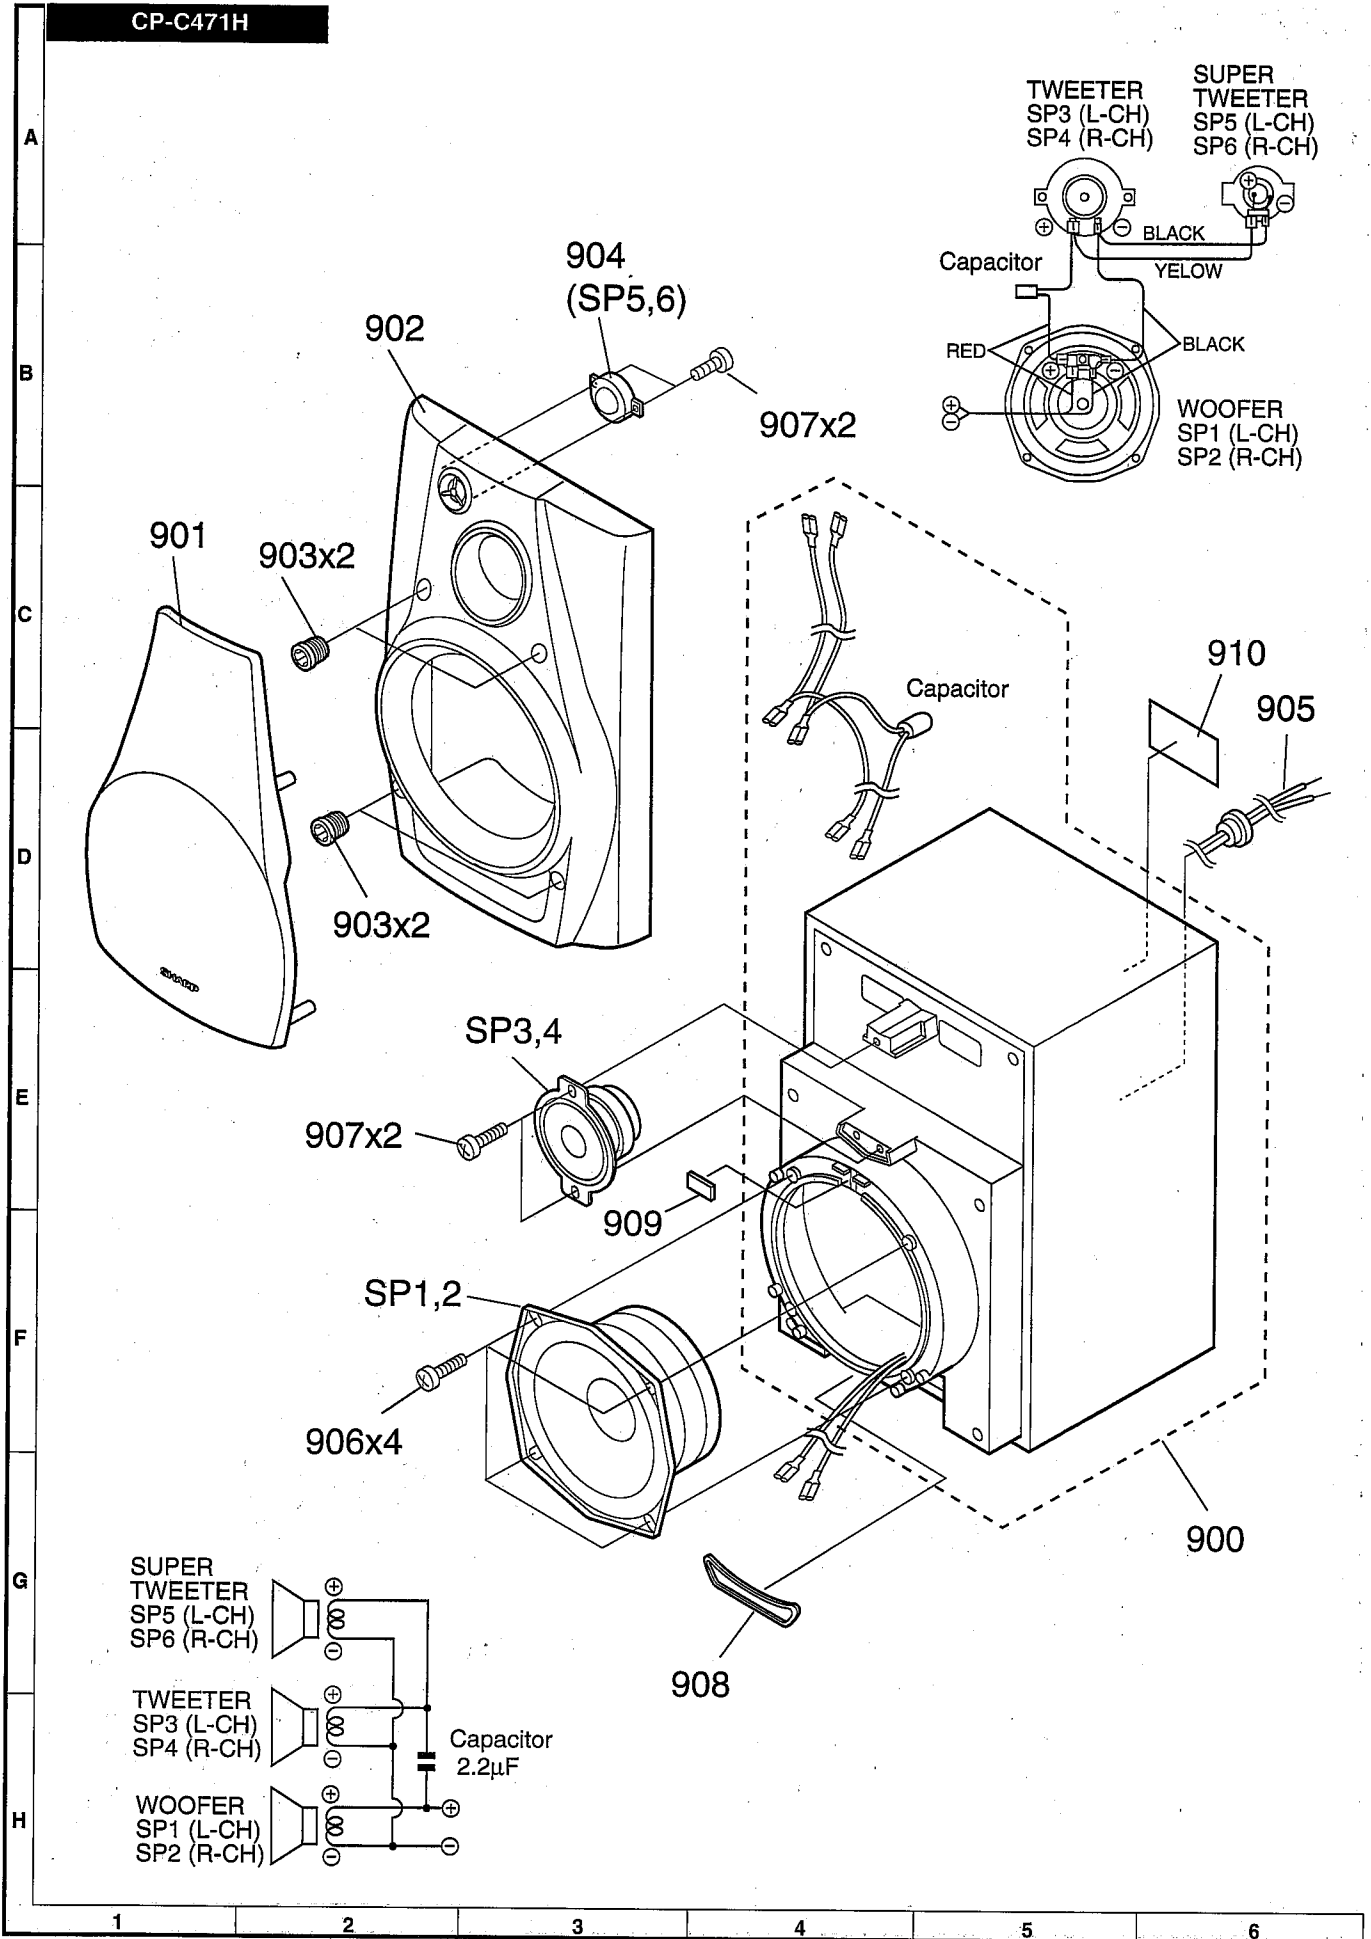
SPEAKER EXPLODED VIEW (1/2)
